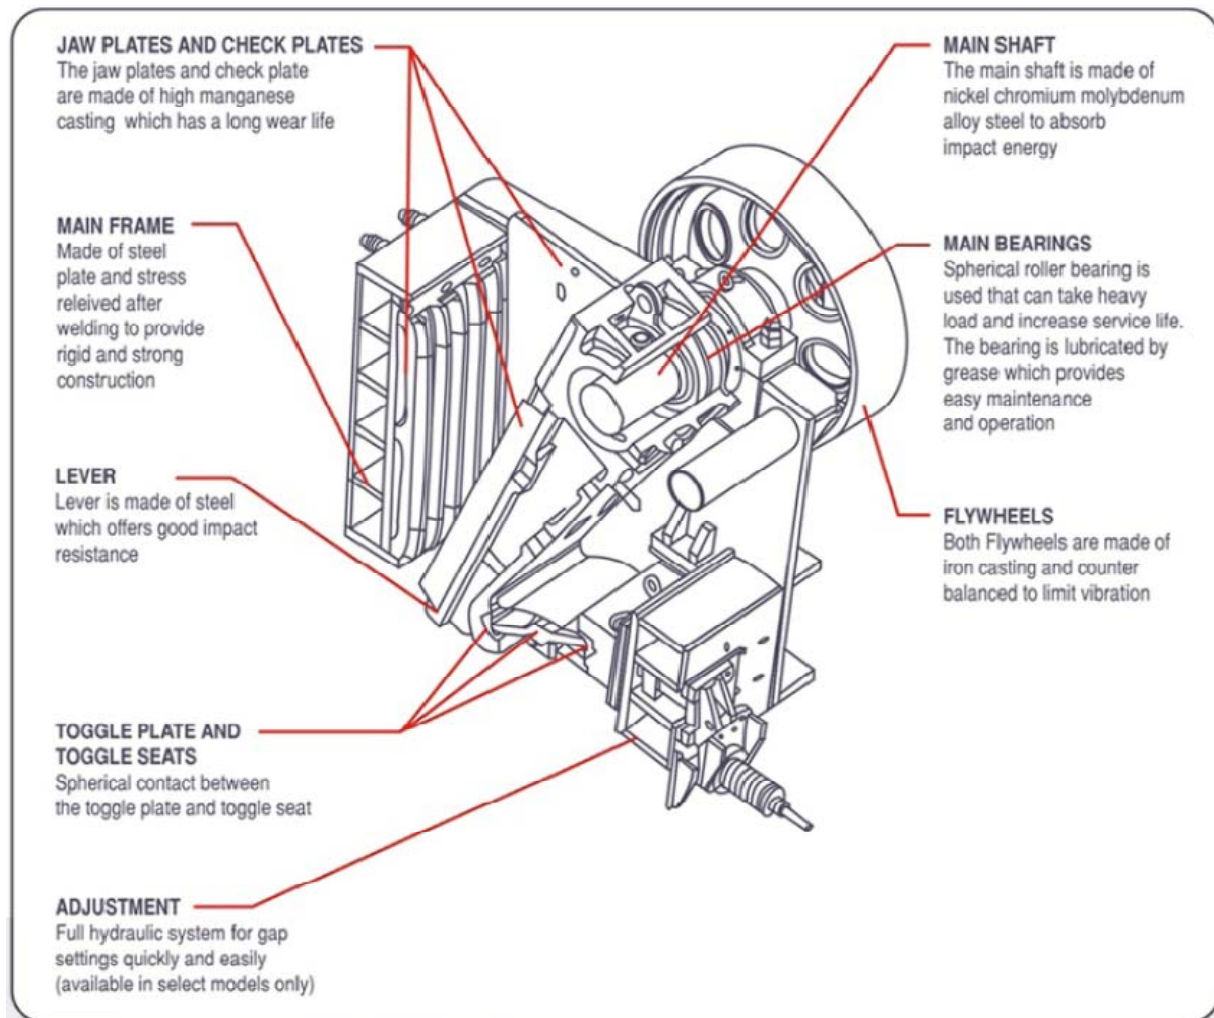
Sectional view showing Components of a Jaw Crusher
